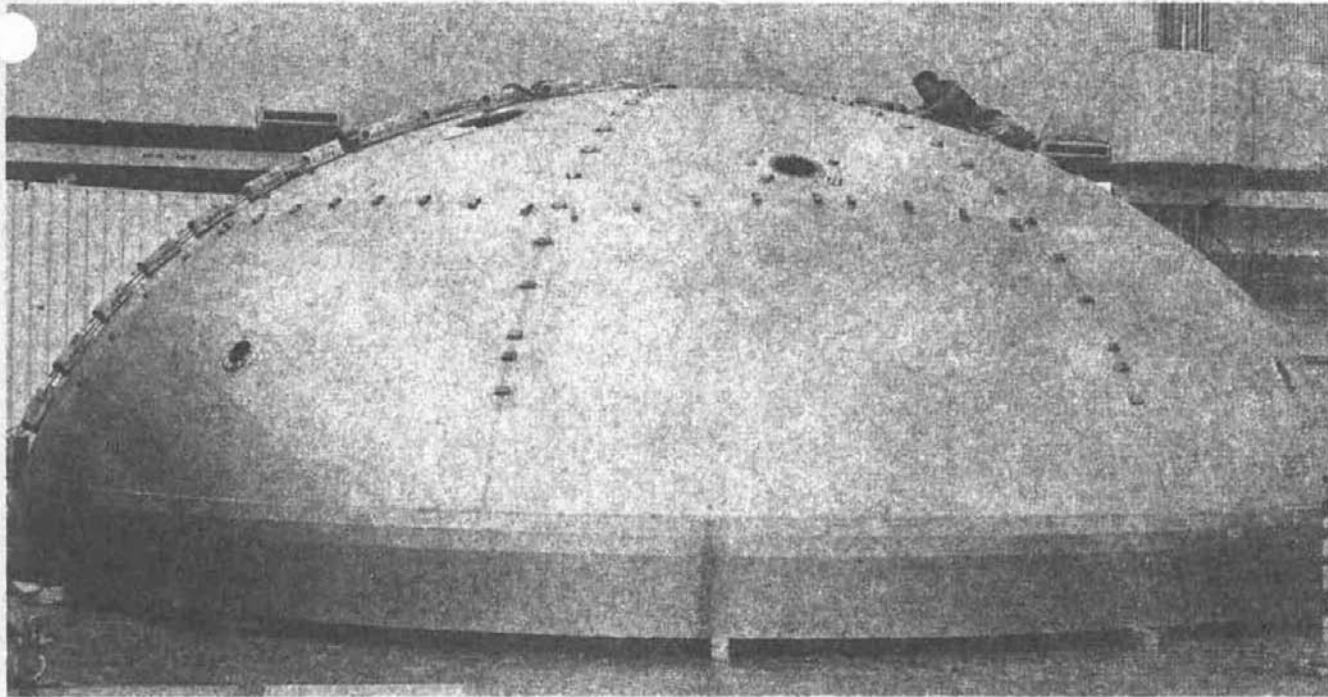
BRACKETRY TIG SPOT WELDED TO BULKHEAD
